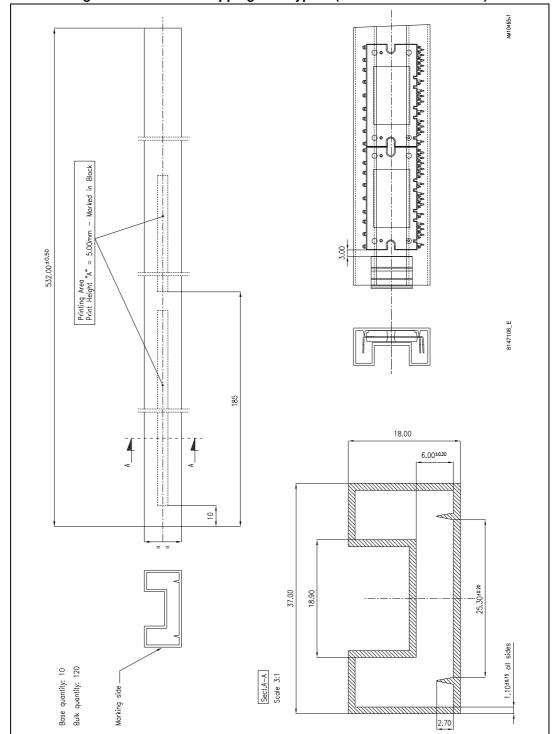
SDIP-38L shipping tube type A (dimensions are in mm.)
